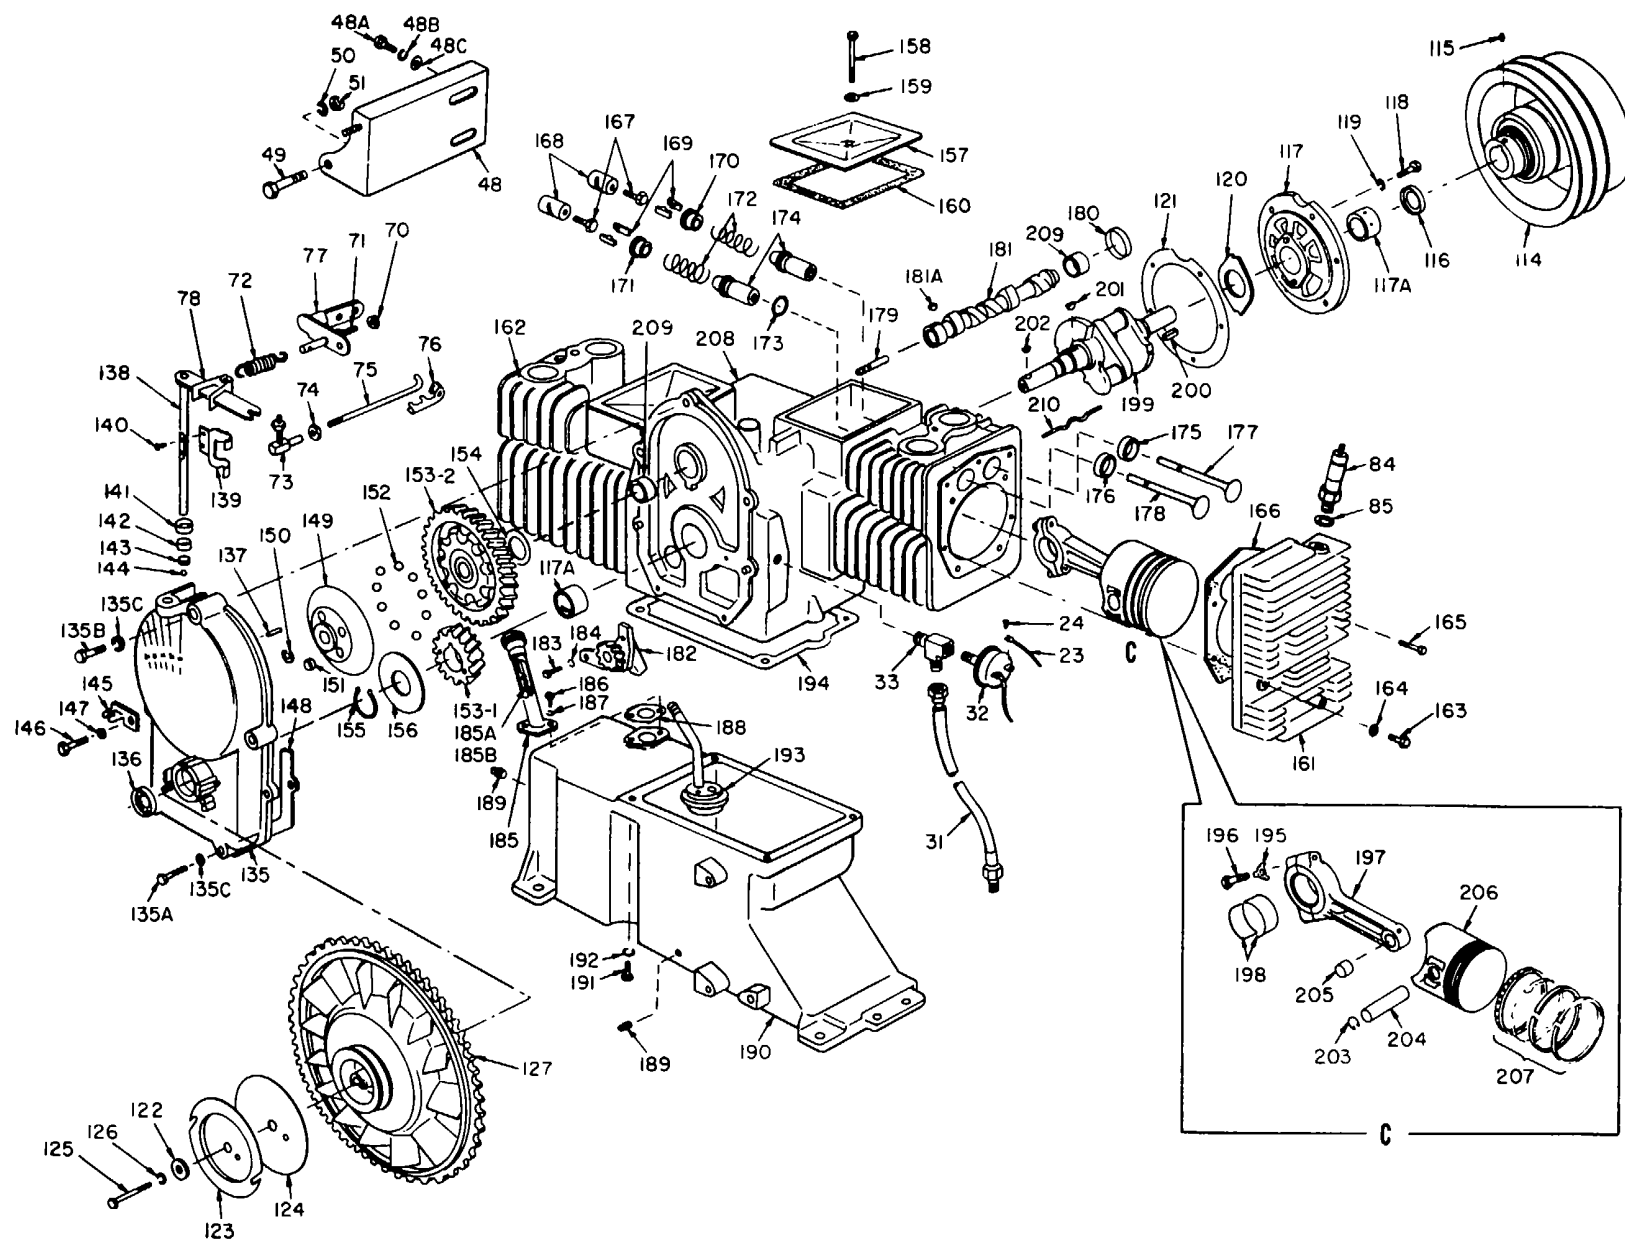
Engine Exploded View (Sheet 2 of 4)
